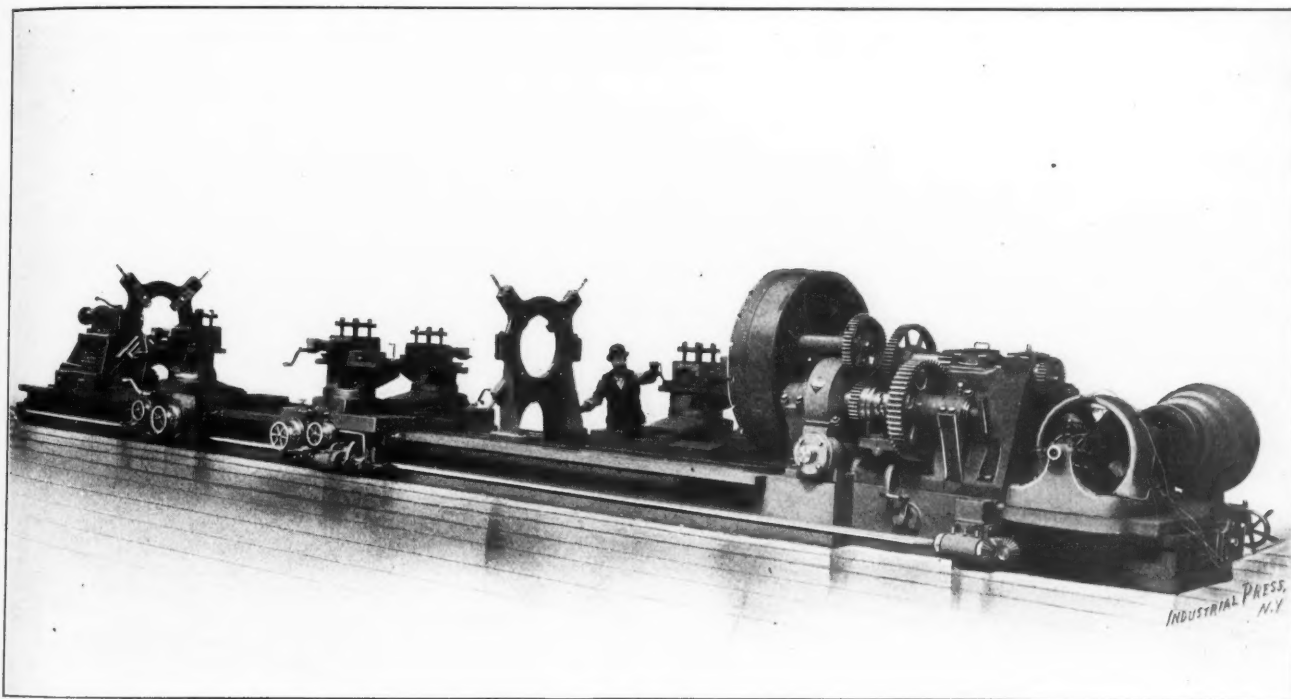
Sixty-three Inch Niles Lathe with Four Carriages, Driven with 15 H. P. Motor.
